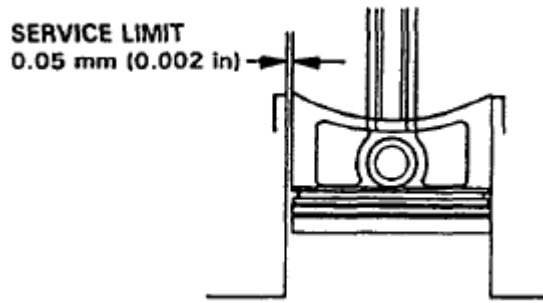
Identifying Clearance Between Piston And Cylinder Bore
